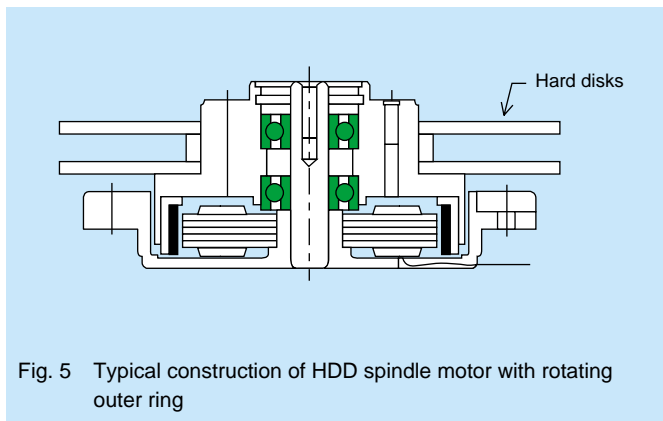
Typical construction of HDD spindle motor with rotating outer ring
